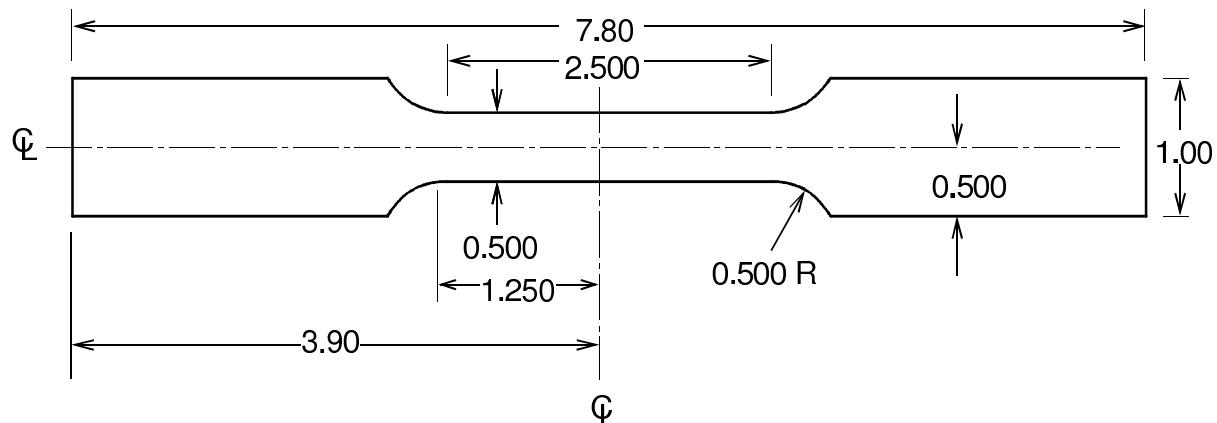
Dimensions of tensile specimen used for static tests (All dimensions are inches).
